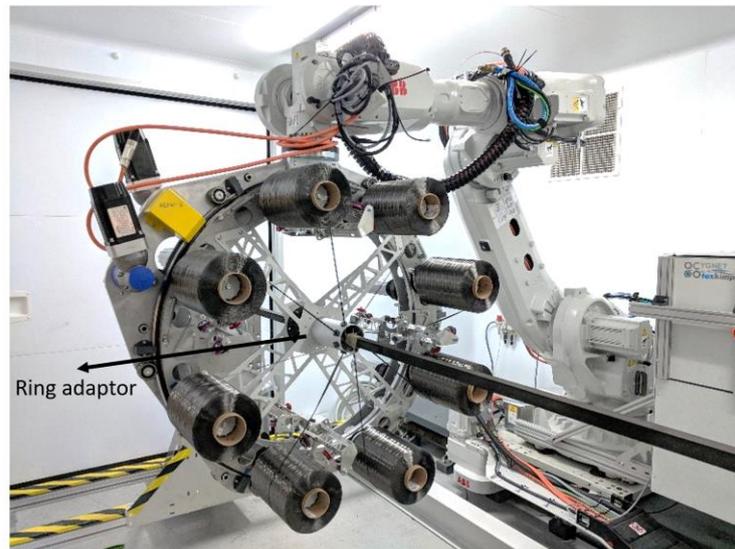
Winding process of Axontex™ beam using 3D complex winding machine in Cygnet Texkimp
